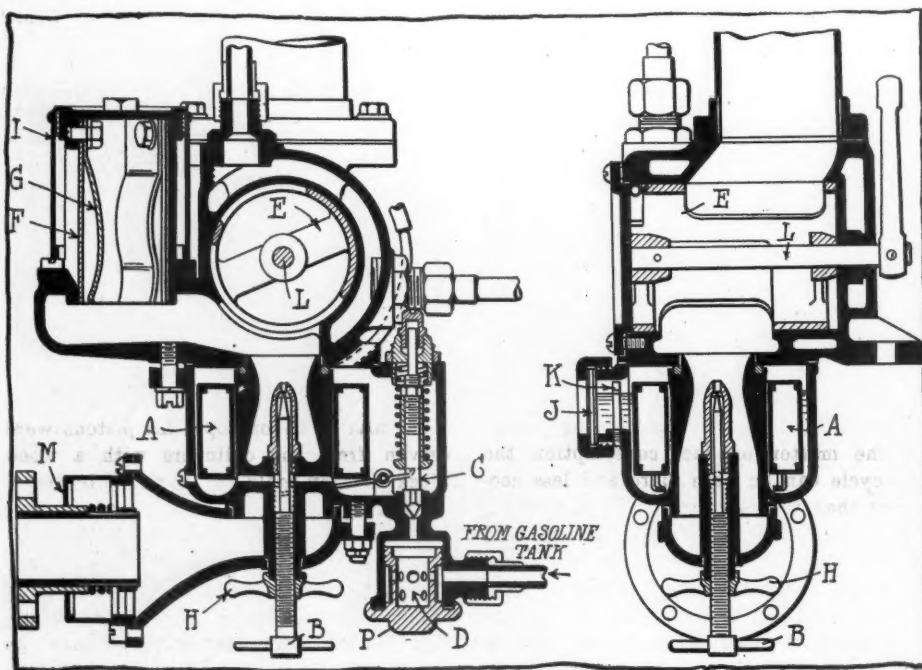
SECTION OF PIERCE-ARROW CARBURETER SHOWING ADJUSTMENTS
